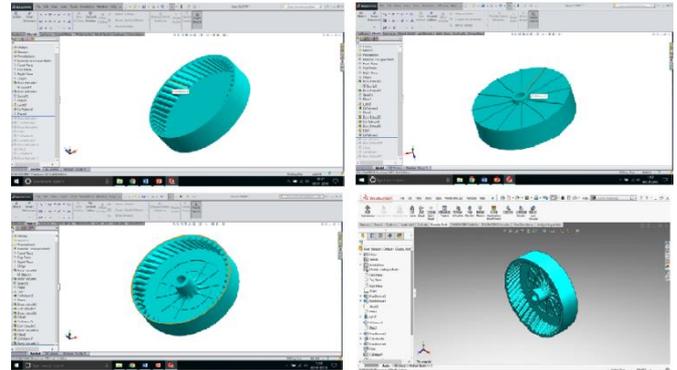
Section Headin3D Model of Transmission Gear in Solidworks
